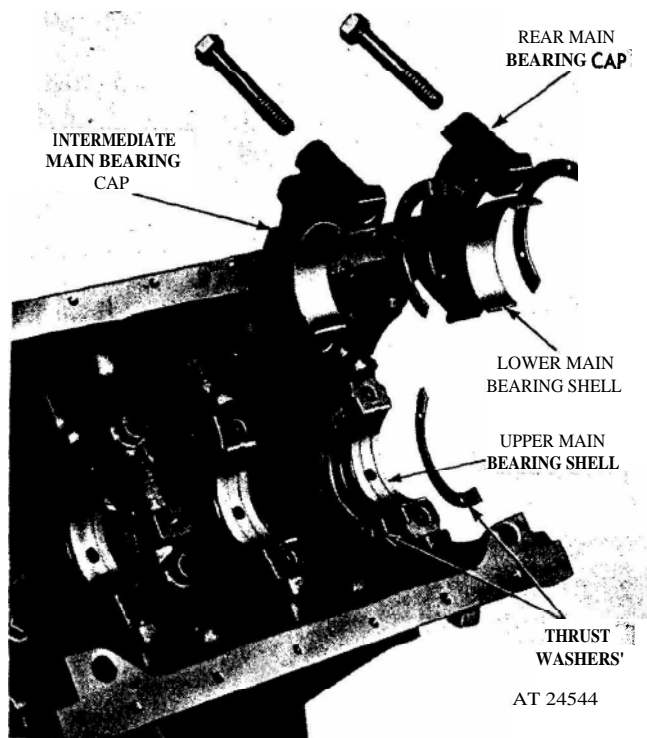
Upper and lower main bearing shells, bearing caps and rear main bearing thrust washers — in-line engines.
